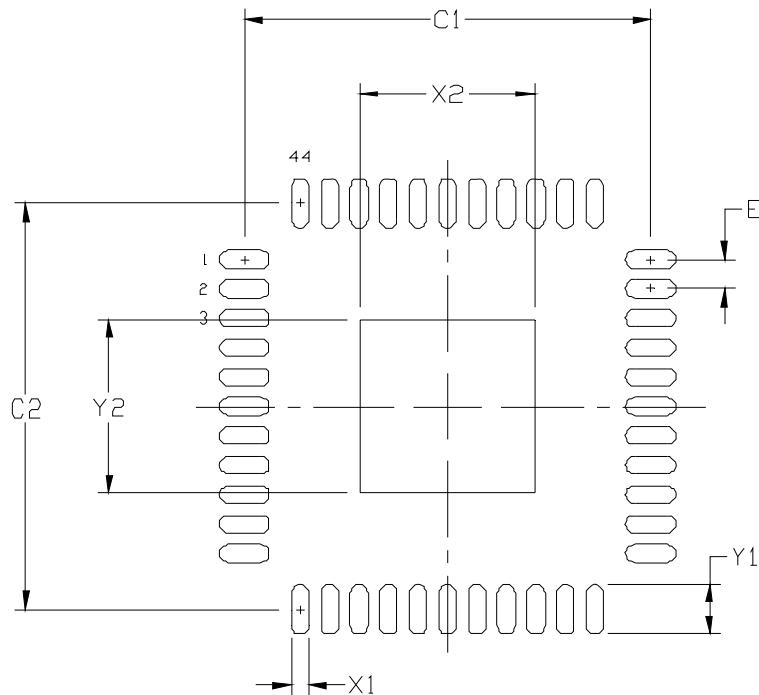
Si53302 7x7 mm 44-QFN Package Land Pattern
